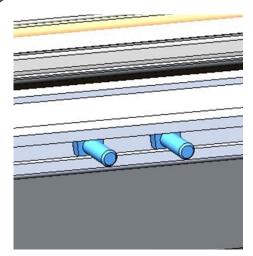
Slide 2x M8x20 hex head bolts into the nut slot frame on side of canopy
